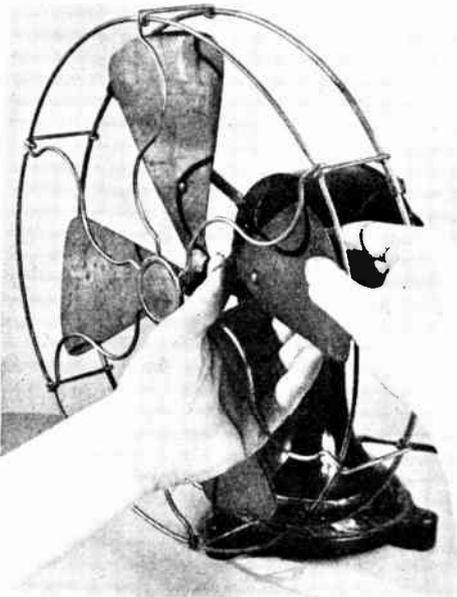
HOW TO ADJUST A BENT BLADE.
